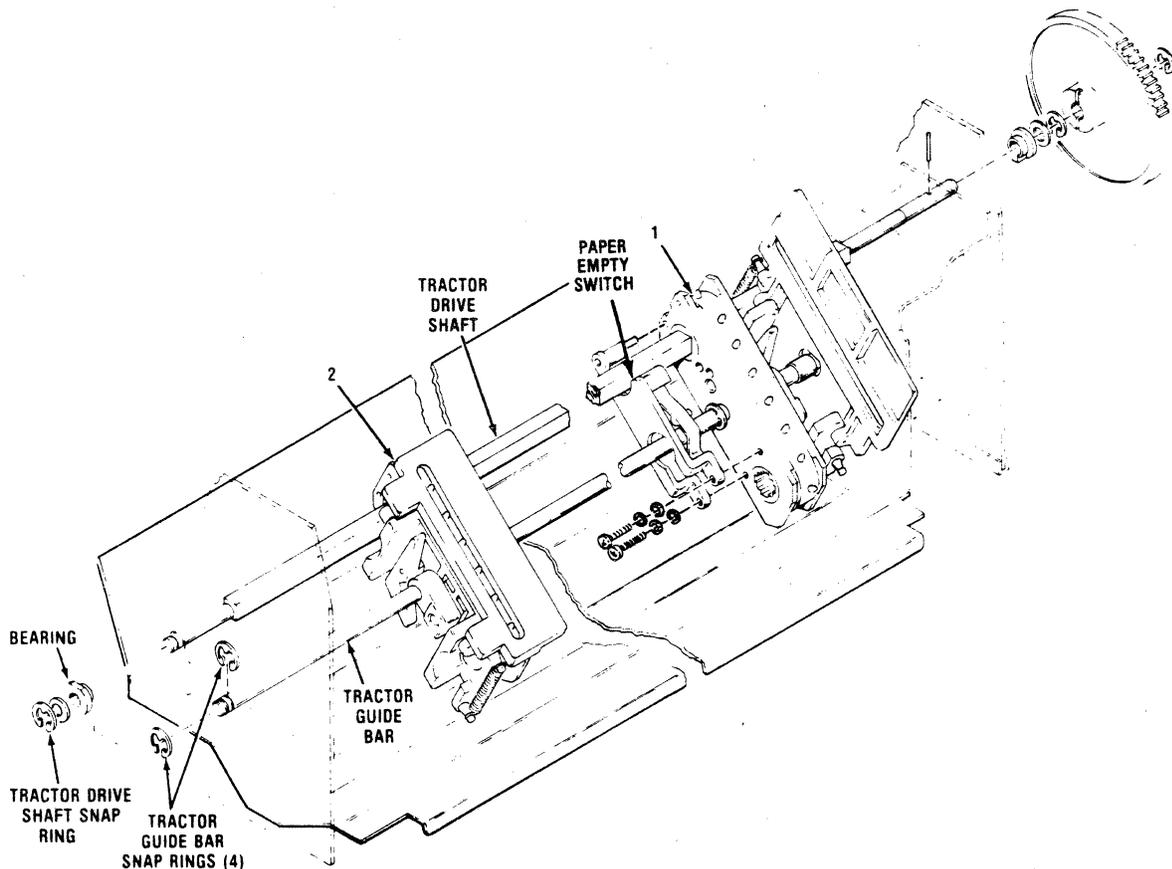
Removal/Replacement, Tractor Drive Assemblies
